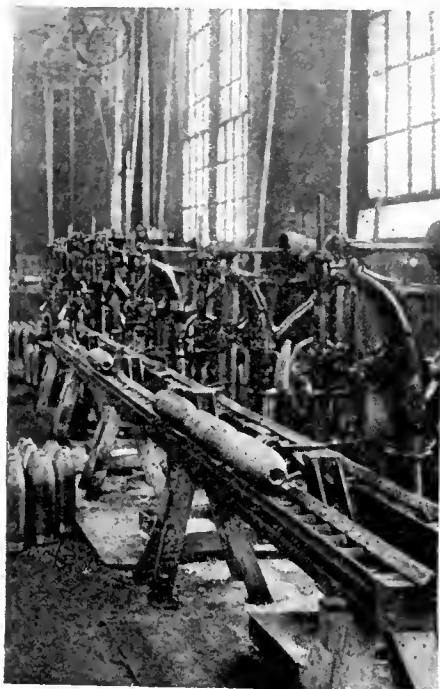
DRILLING SCREW HOLES IN NOSE SOCKET AND SHELL.
